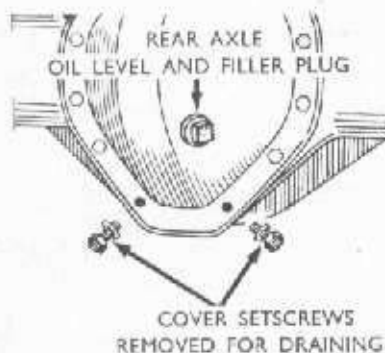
Housing cover bottom setscrews removed from rear axle for draining.
